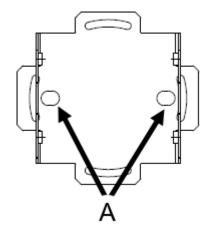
Large bracket holes on the 1-axis tilt part of KT-147407-02 bracket
